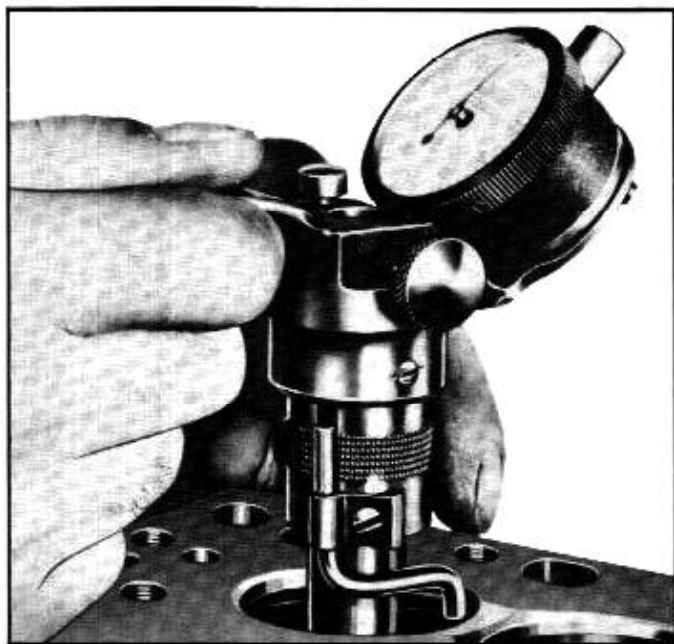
C-116—Checking Valve Seat Run-out — Typical
